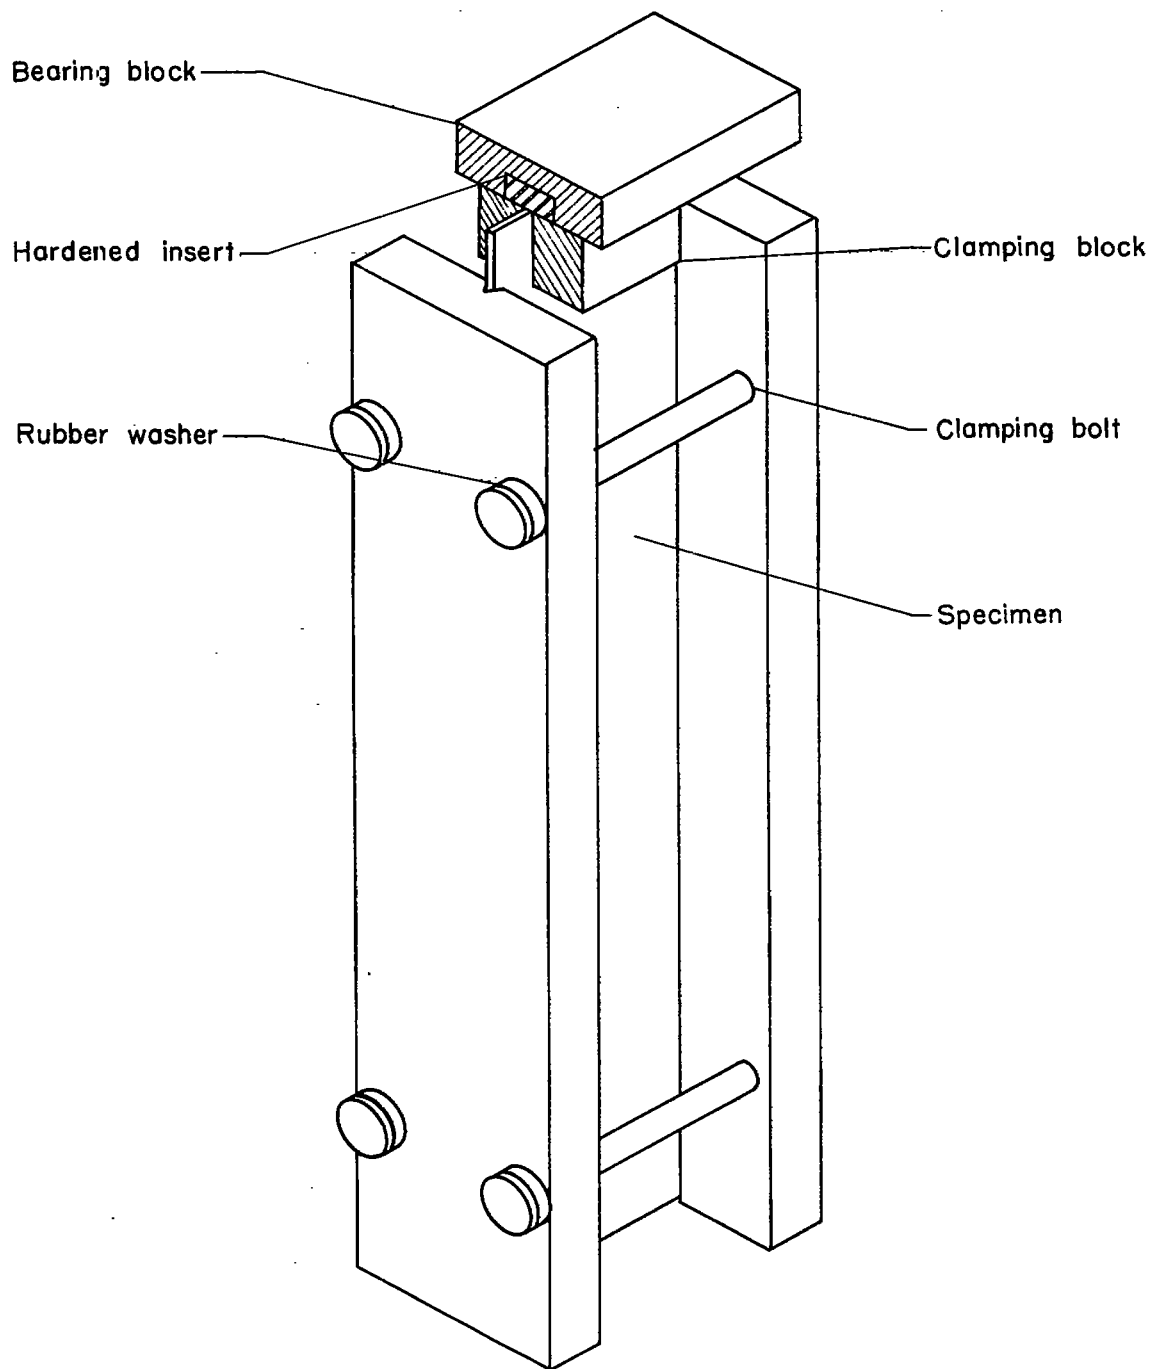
V-groove edge fixture for plate compressive-strength test.
